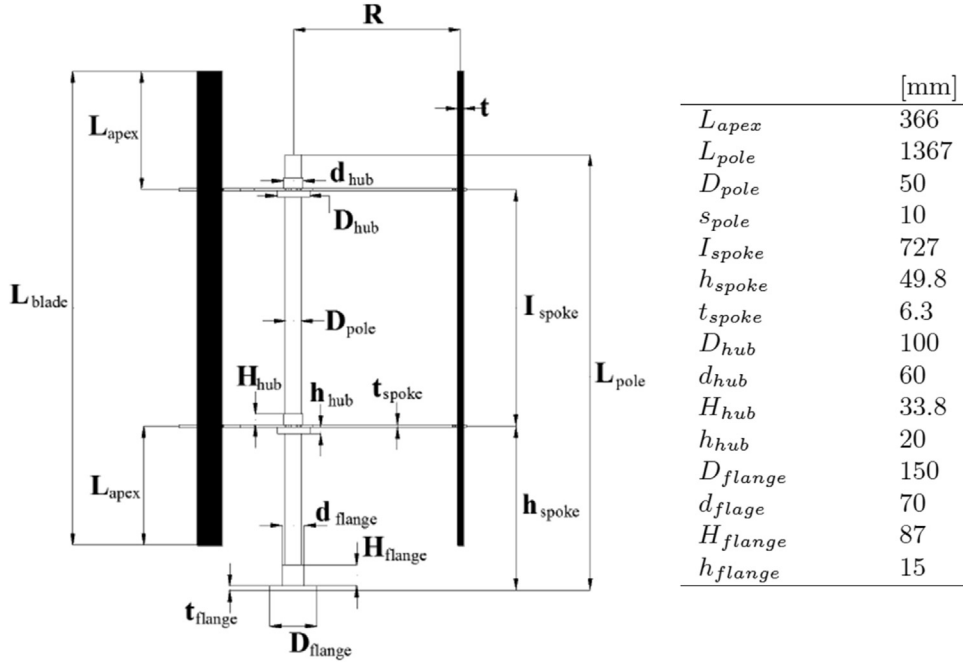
Quoted drawing (in mm) of the H-shaped rotor.
